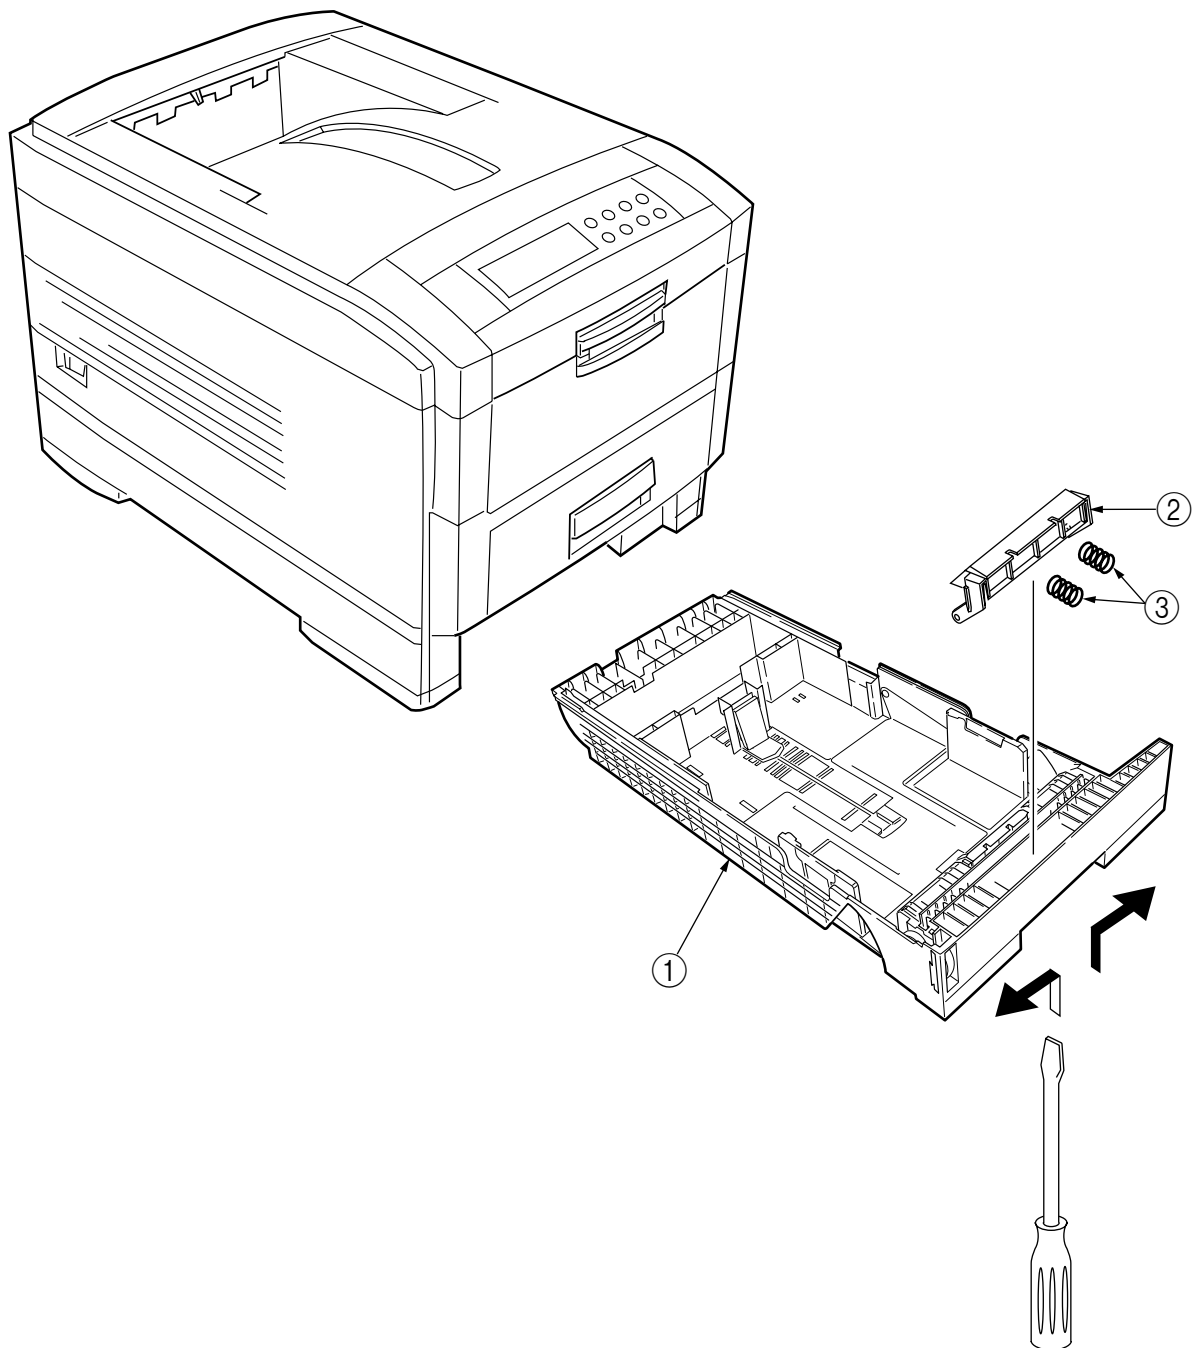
Retard Pad Assy/ Retard Pad Assy Spring
